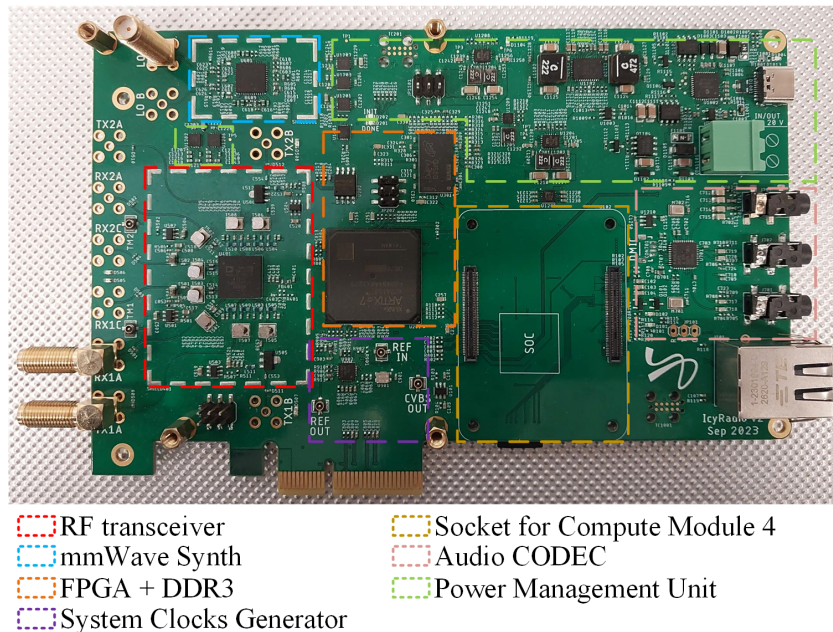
Assembled PCB prototype of the base SDR platform with identified functional sections.
